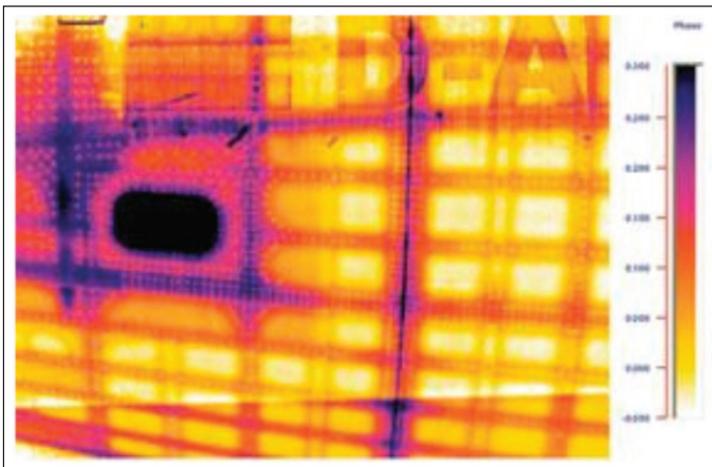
Fuselage inspection of a Boeing 737 using lock-in thermography shows the skin lap joints, stringers, doublers, and rivets. This image shows no defects. The frame station and the frame window appear in a darker color, an indication that they are made out of thicker material. (Vision Systems Design)
